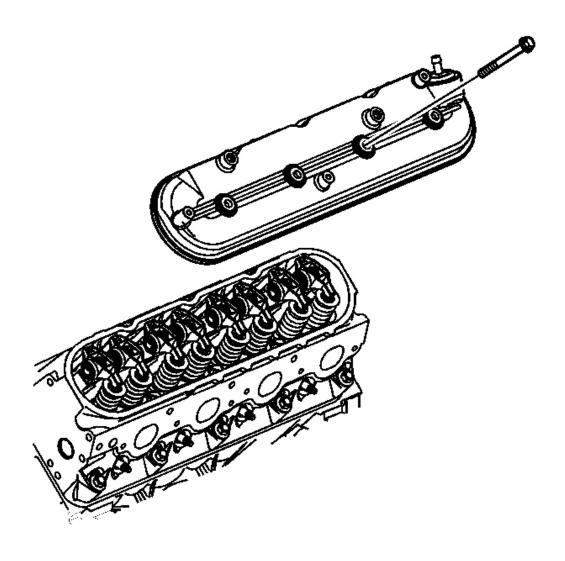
View Of Valve Rocker Arm Cover Courtesy of GENERAL MOTORS CORP.
